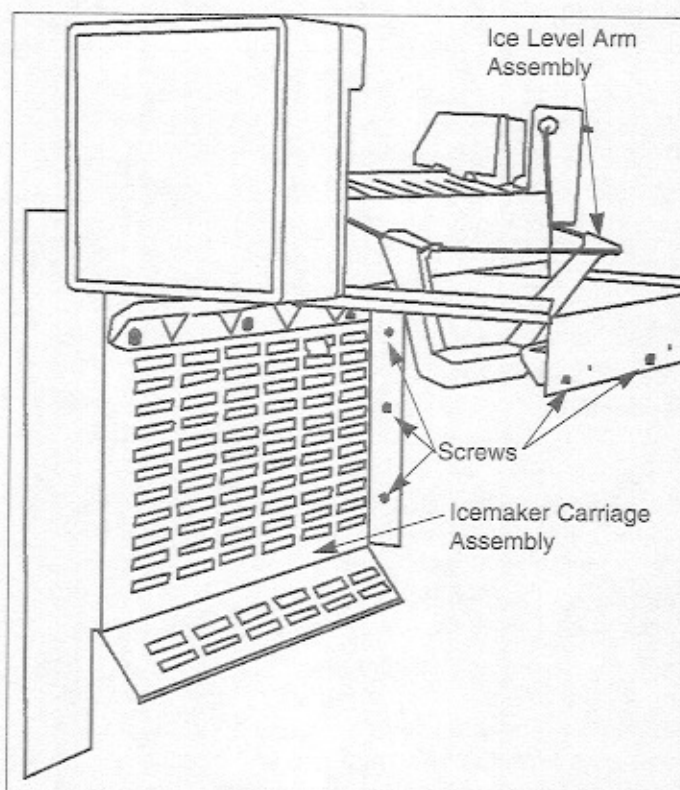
Model 690 Icemaker and Carriage Assembly
